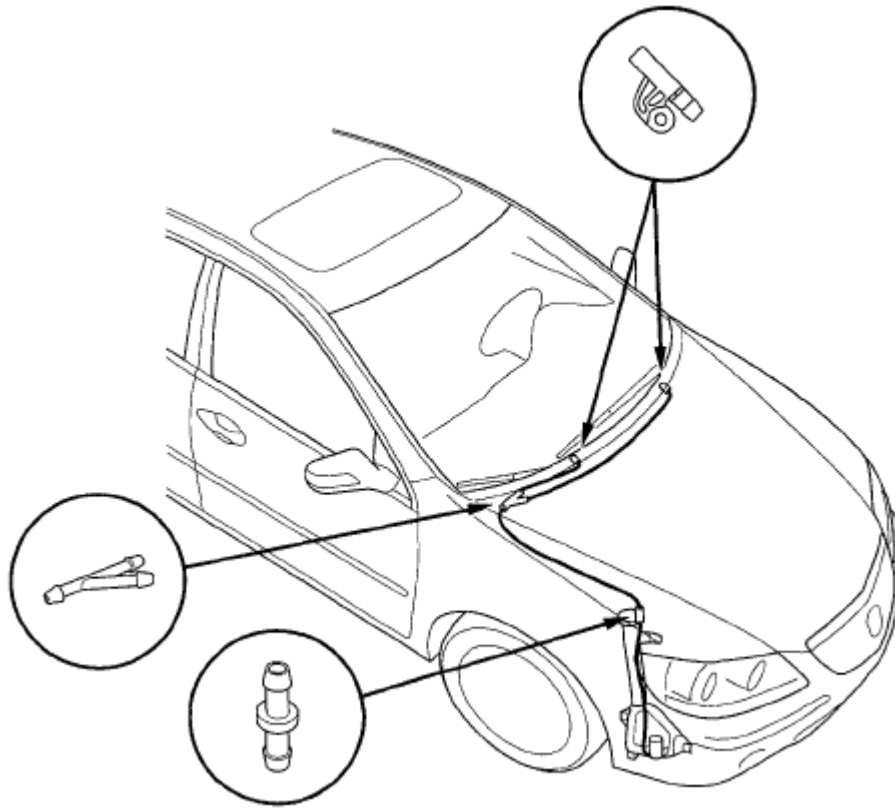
Identifying Windshield Washer Nozzles, Tube And Clips
